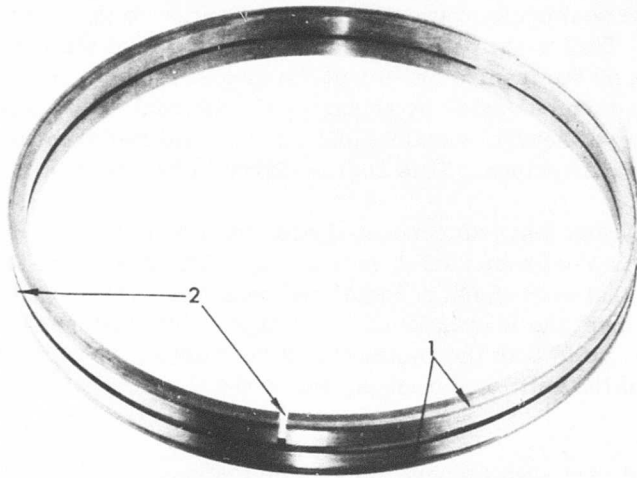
Regenerator I.D. Ring Seal, All-Metal Split Ring Seal Showing (1) Sealing Lips and (2) Staggered Joints.
